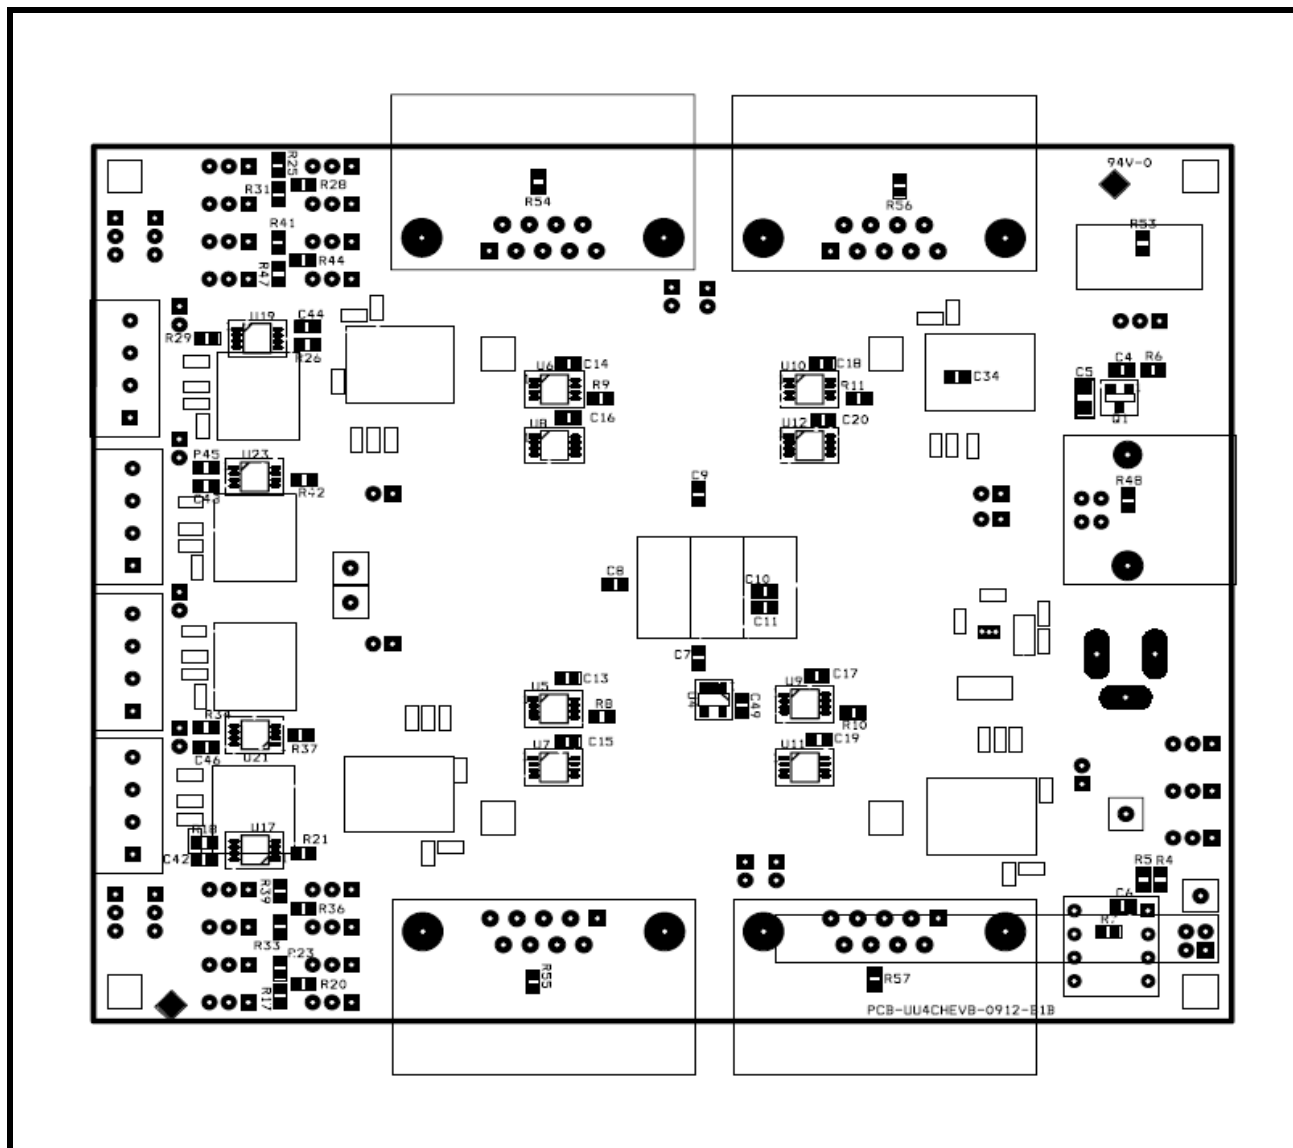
shows a bottom view of XR21V1414 evaluation board layout.
